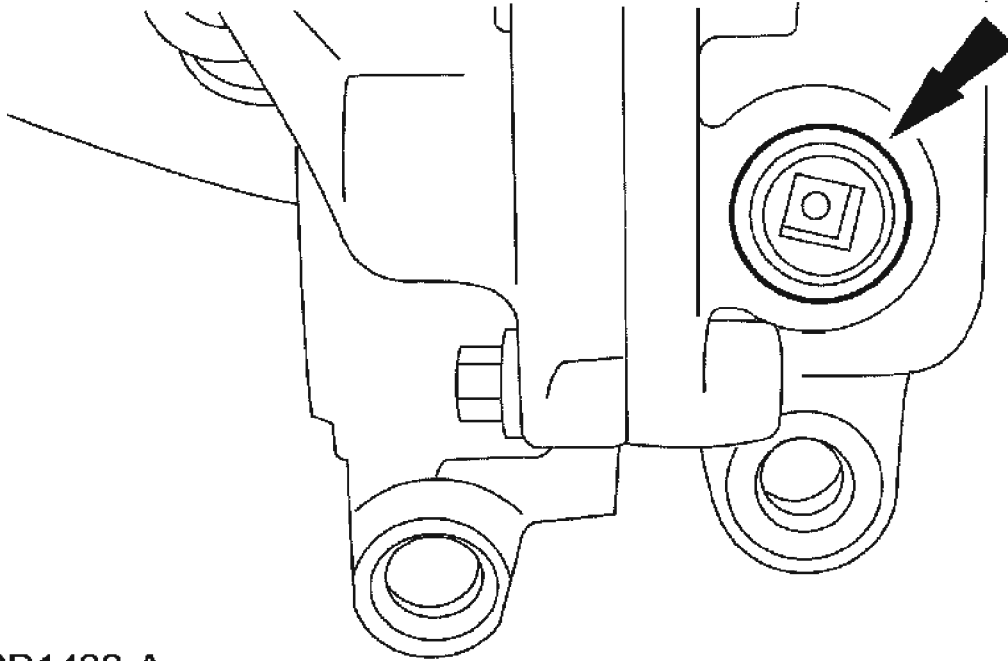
Identifying Front Roll Restrictor Bolt & Bolts For Engine Support Crossmember
